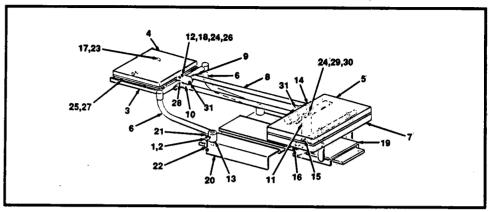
SEAT AND HEAD SECTION WITH IRONS ASSEMBLY (BF00-013).
